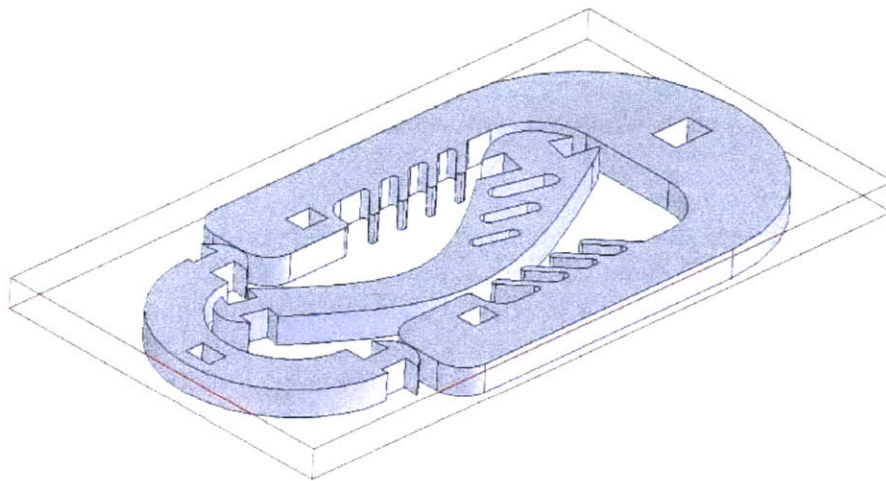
Unassembled version of *The Back Stroke Buddy* ready to be packaged and shipped.
